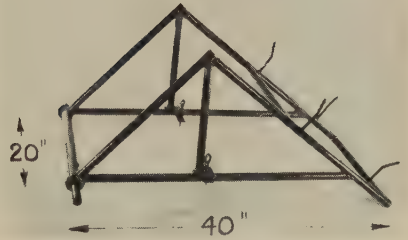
The chassis, less wheels and tank, showing the principal dimensions.
